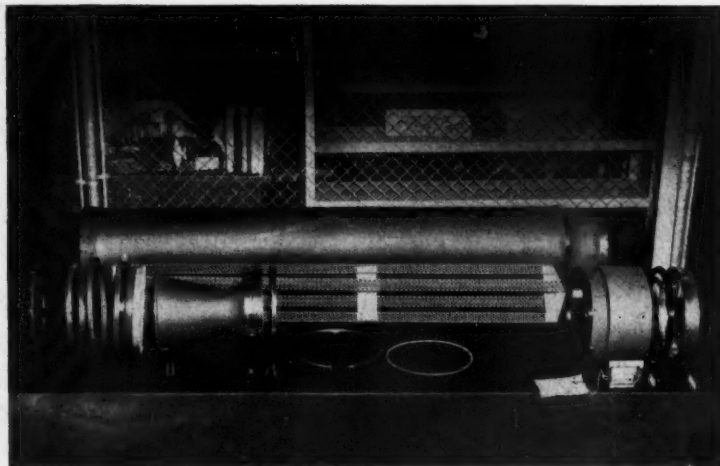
Finish-machined components for a rocket engine ready for assembly
